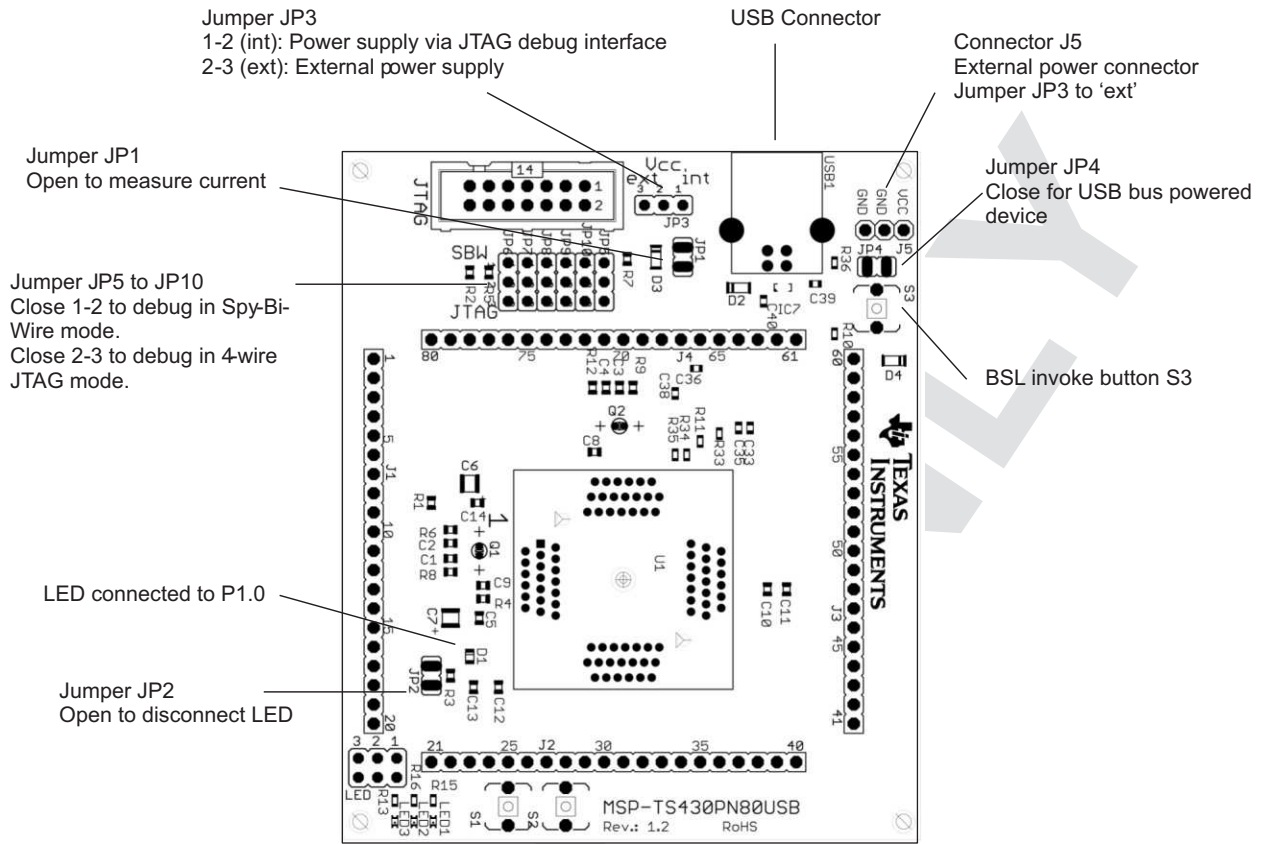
MSP-TS430PN80USB Target Socket Module, PCB
